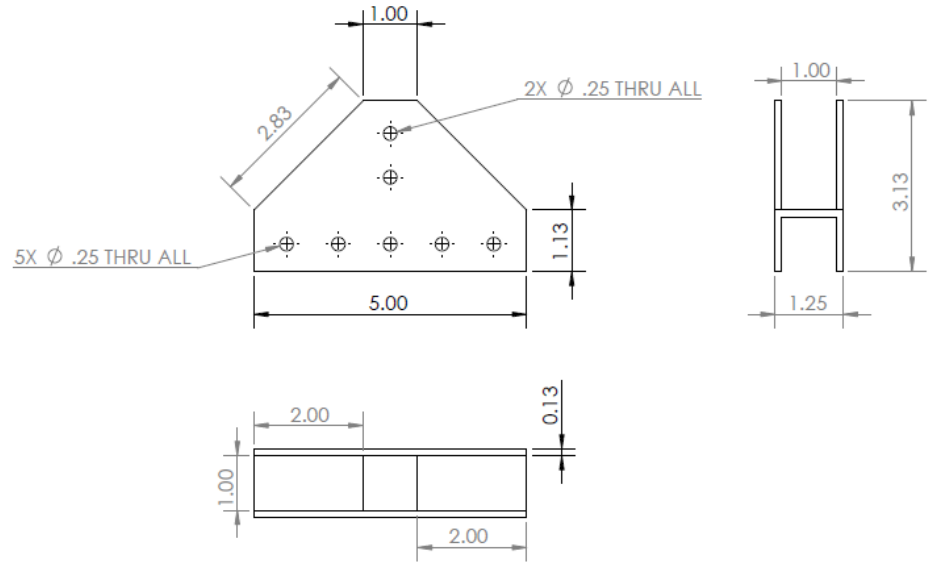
SolidWorks Dimensioned Plan Set for Detail D Connection
